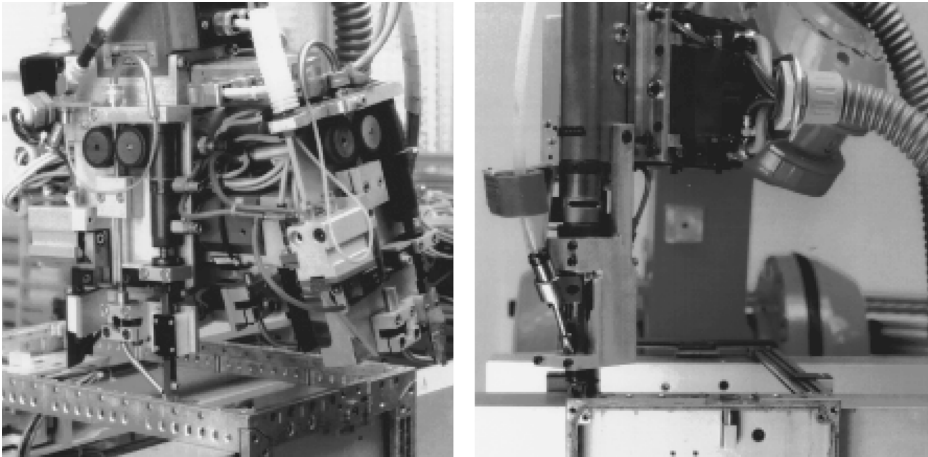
Robot tool for fitting of metal cord in front frame (left) and for screwing of frame parts.
